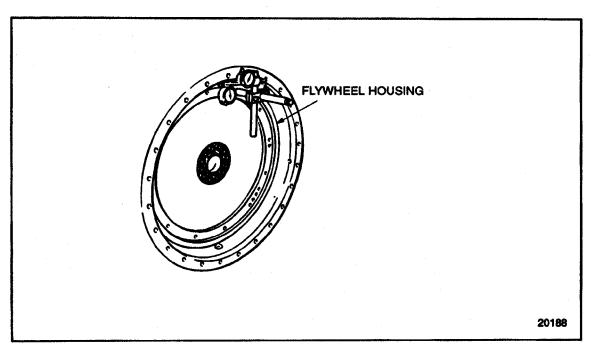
Measuring Flywheel Housing Bore Concentricity and Bolting Flange Run-out
